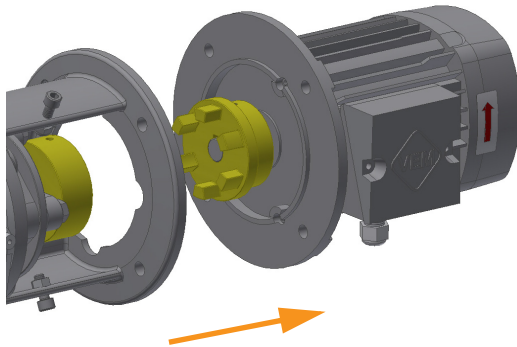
Bearing housing (drive side): Pulling off motor from bearing housing
